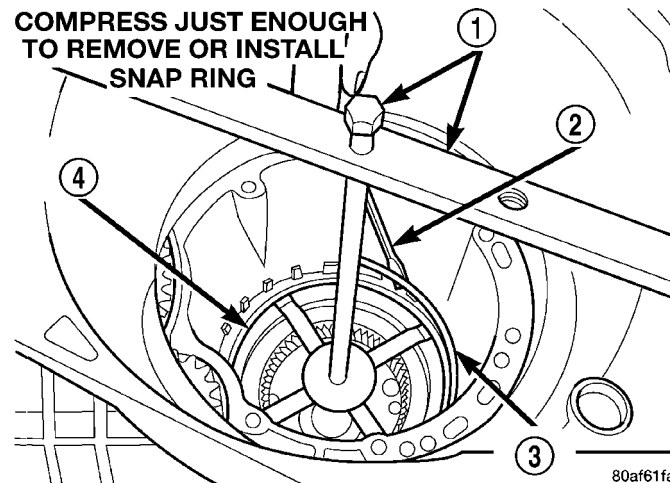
Install 2/4 Clutch Retainer Snap Ring
